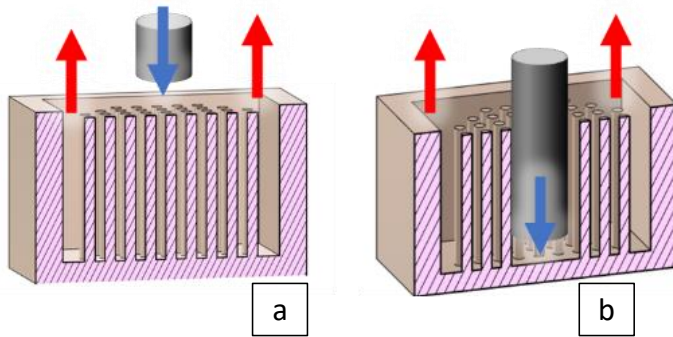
Representative CAD cut-sections for TDU. (a) Configuration 0 with fluid inlet at the top plate. (b) Configuration 1 with fluid inlet close to copper base.
